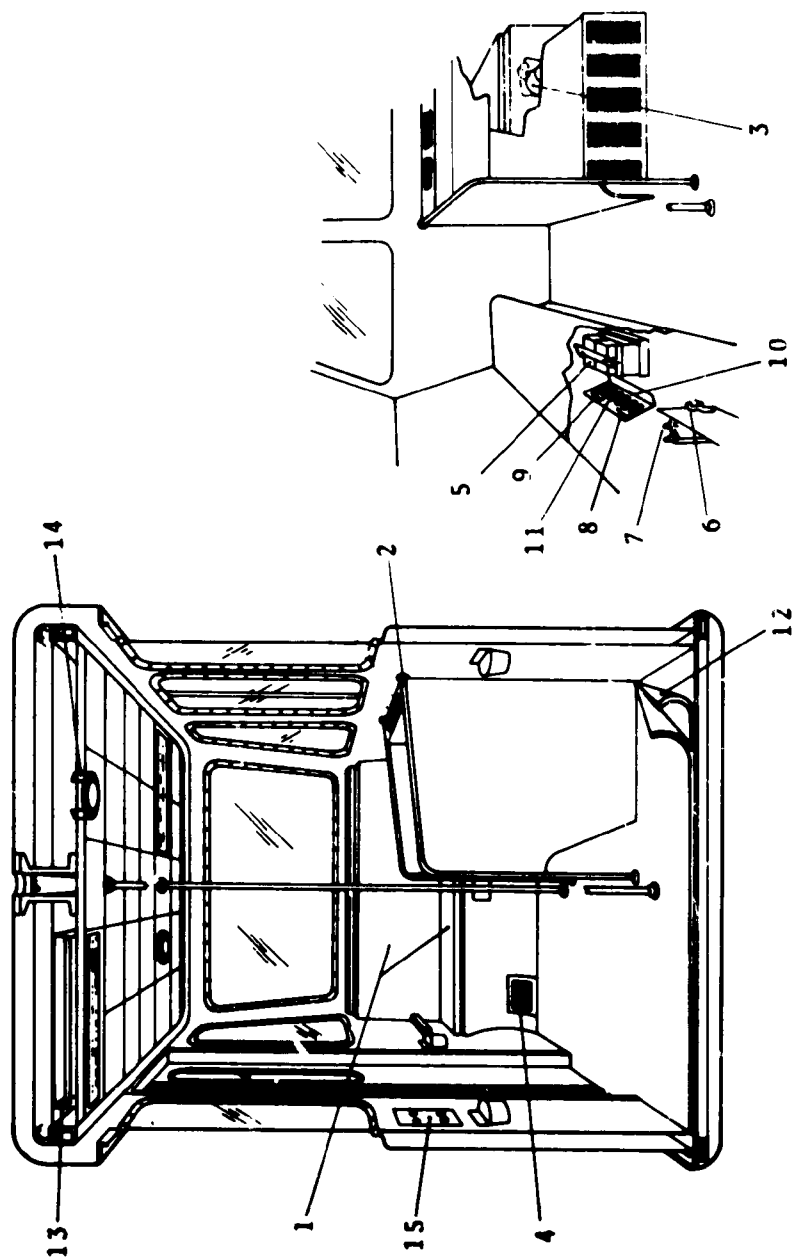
DETAILS OF JETRAIL INTERIOR
